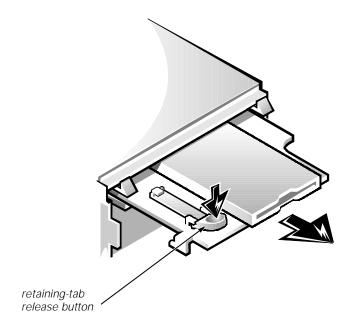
3.5-Inch Diskette Drive Assembly Removal
